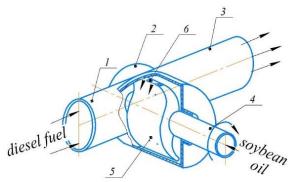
Mixer for motor fuels according to the author's patent: 1 - nozzle for fuel supply; 2 - body; 3 - nozzle for removing the fuel mixture; 4 - pipe for supplying SME; 5 - rotor; 6 – openings Source: [25].
